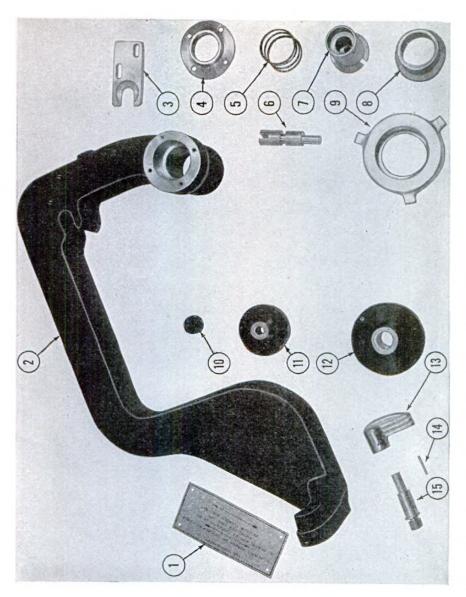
Screen arm and shutter knob-assembly, disassembled.
